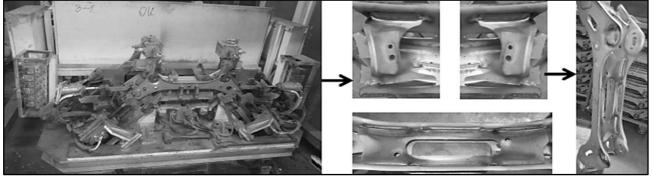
Welding procedure in S03-1, S03-2 [7]
